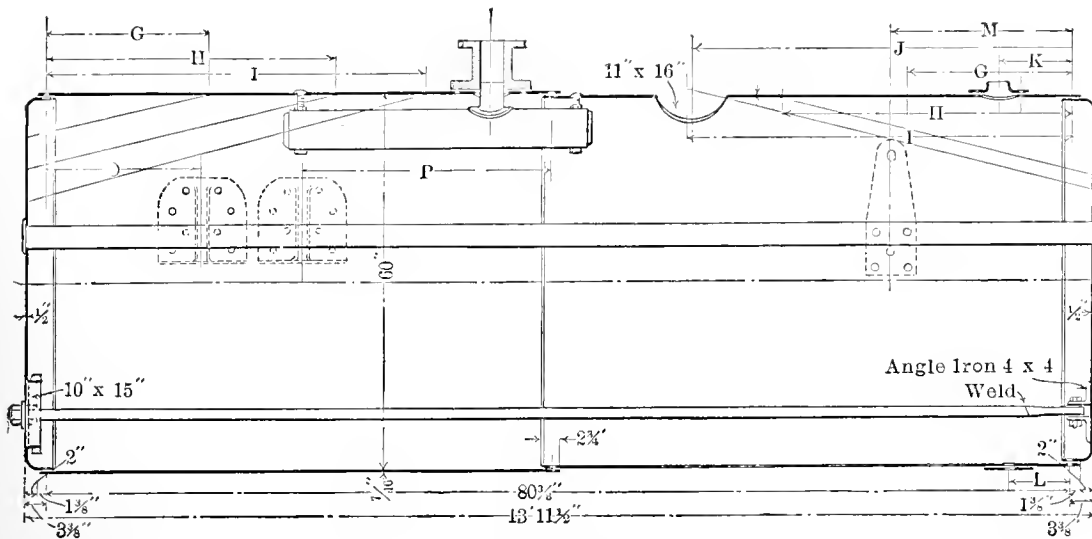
SECTIONAL VIEW OF COMPLETED BOILER.
